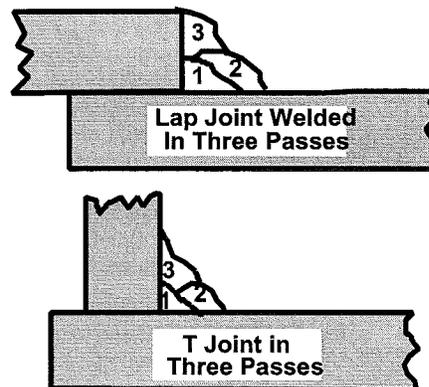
Triple Pass Lap and T Weld Joint
